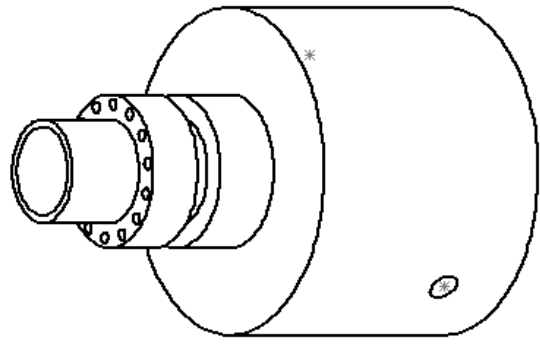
Drawing of the insert component of pellet holder for the pressurized counterflow burner.
